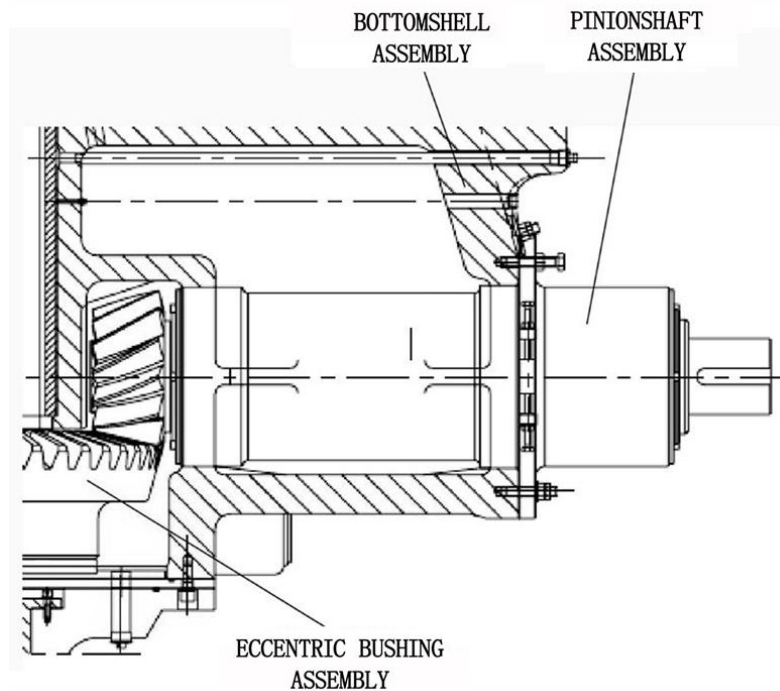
Assembly of the Pinion Shaft and bottom shell for gyratory crusher PXZ-1500II
